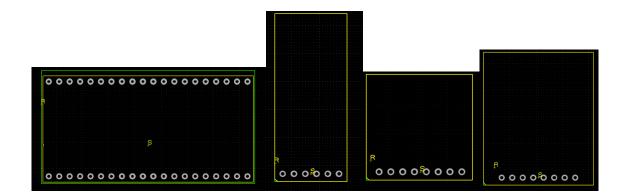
mbed, Bluetooth module, INA260 and SD breakout board footprints.
